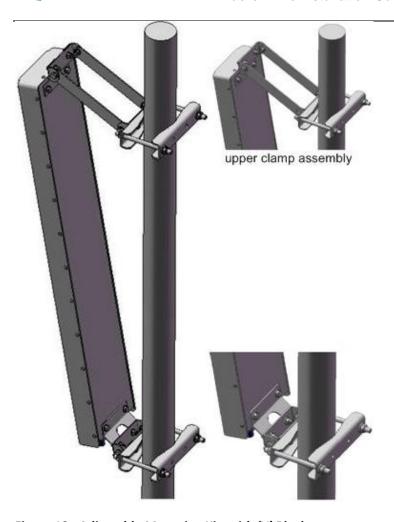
Adjustable Mounting Kit, with 'V' Blocks
